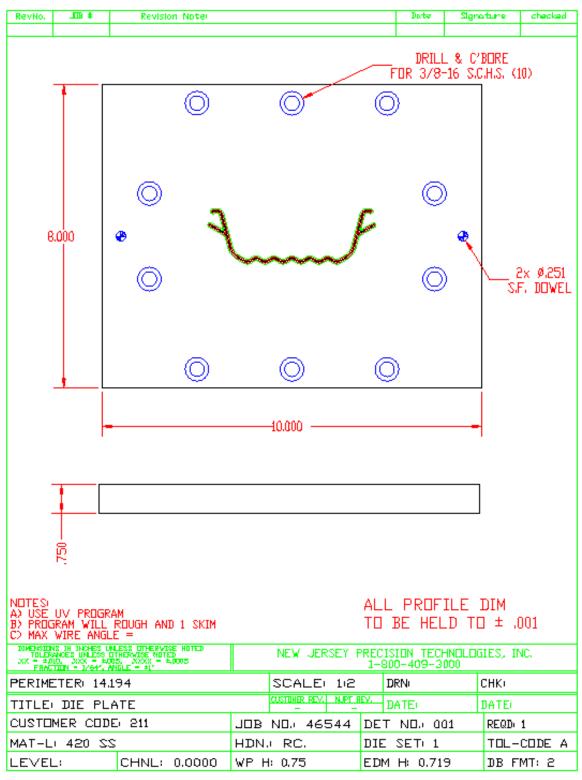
Drawing sheet generated for Job 46544 depicting Die plate.
